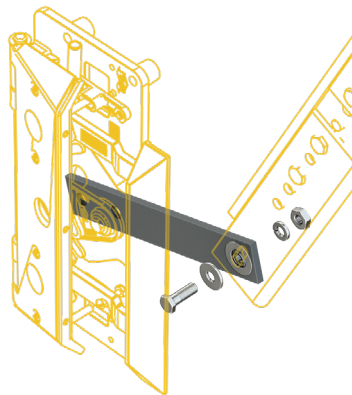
Use hardware in Bag A to fasten clutch/door link to lower arm.
